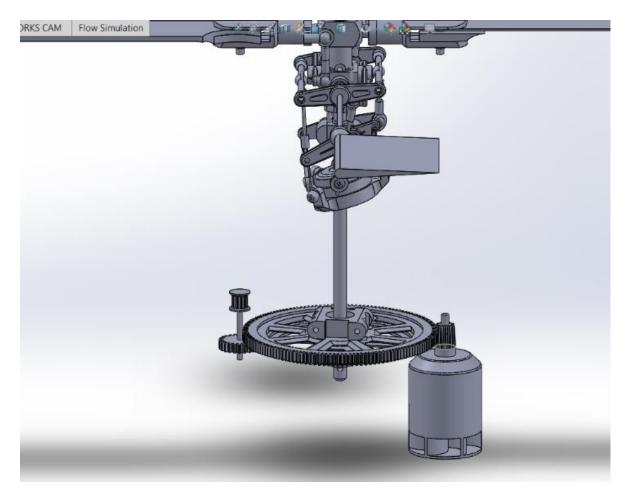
Main Rotor Mechanism and Gear Configuration (Perspective 2).
